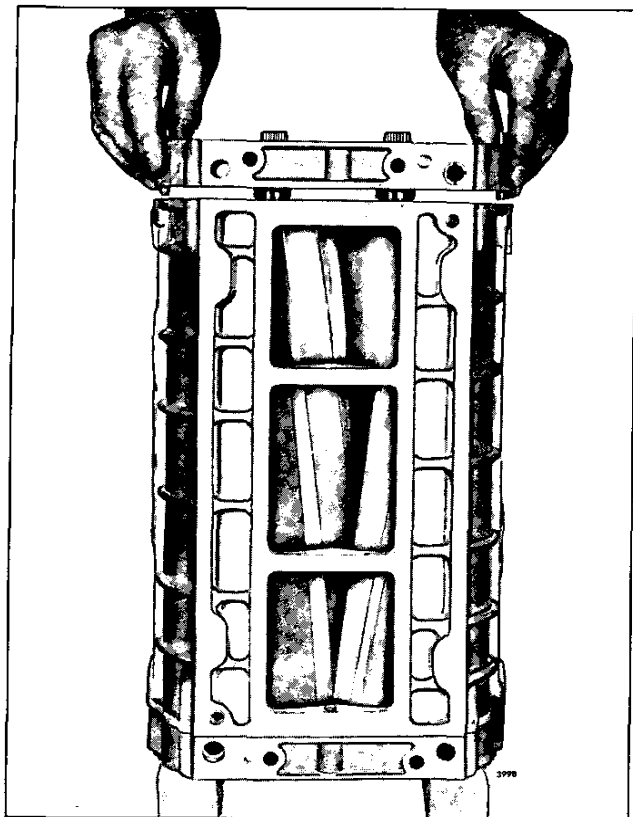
Installing Rear End Plate on Blower Rotors and Housing
